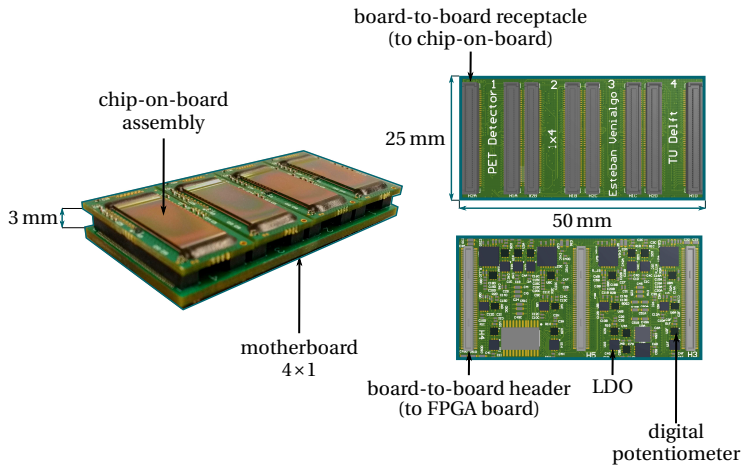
Motherboard 4×1 detailed assembly. Assembly photograph (left) and rendered design images (right).
